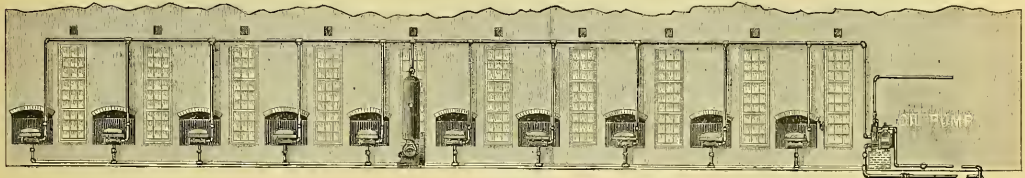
FORGES BURNING CRUDE PETROLEUM.
